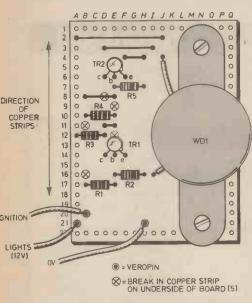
Component layout. Note breaks in copper strips on underside, and link wires to be fitted to top of board.
